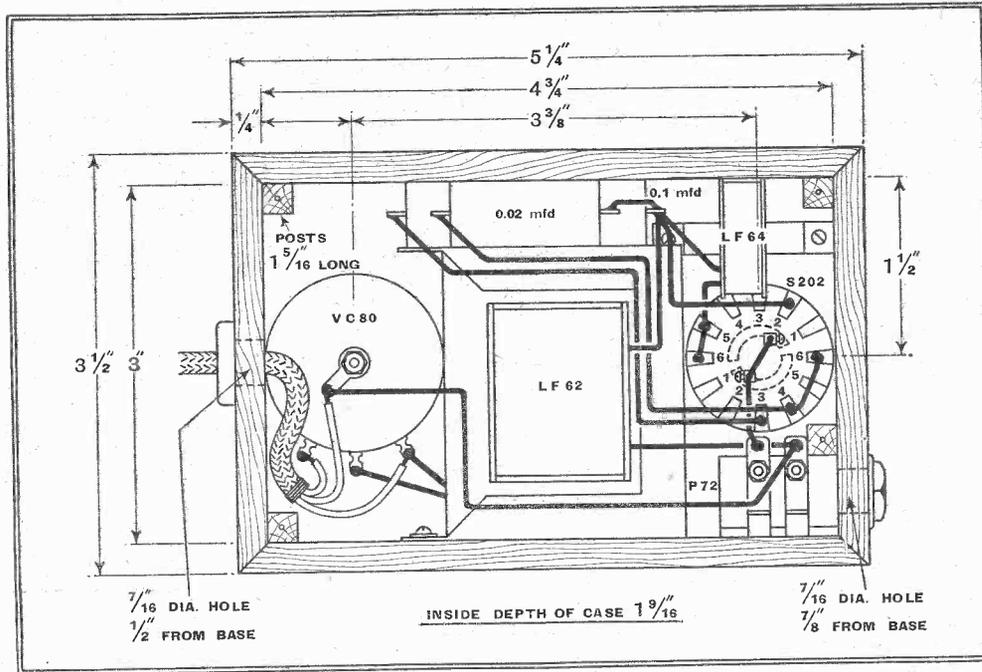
Wiring diagram of the deaf-aid adaptor unit. When constructing the unit work to inside dimensions.
